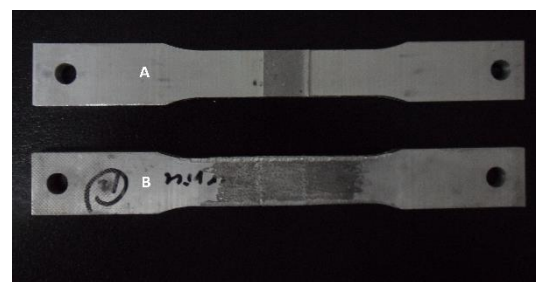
Fatigue test specimens as-welded (A) and with PIT treatment (B) and the length of treatment
